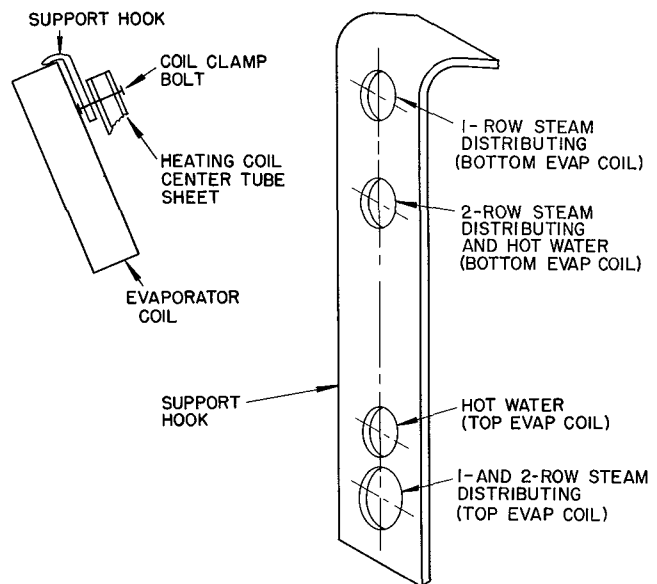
Mounting Holes for Support Hook and Assembly Sketch
